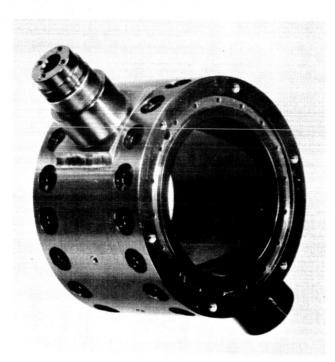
MACHINED ACCELEROMETER SLEEVE
